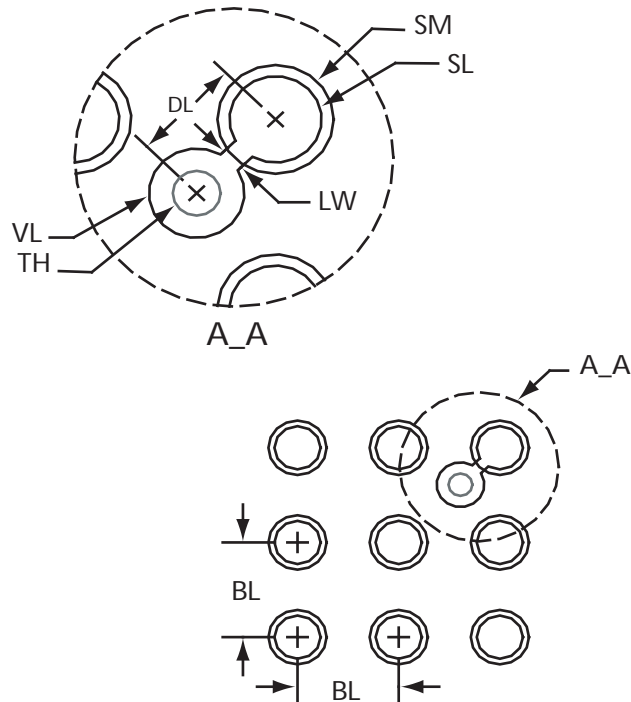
Suggested Board Layout of Soldered Pads for BGA Packages
